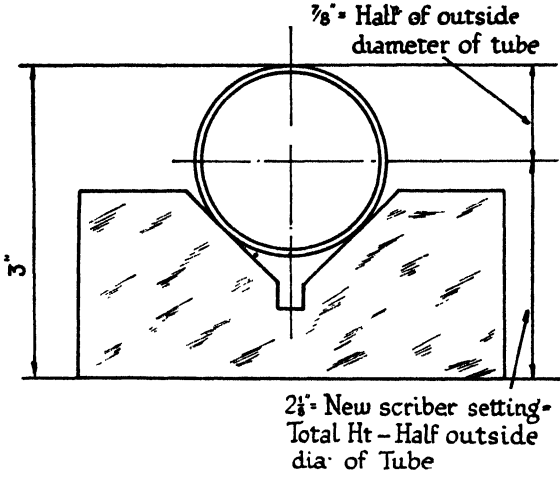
METHOD OF FINDING THE CENTRE LINE OF A TUBE
